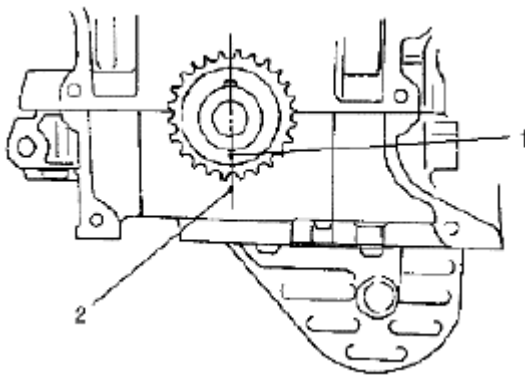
Identifying Crankshaft Timing Sprocket Timing Mark
